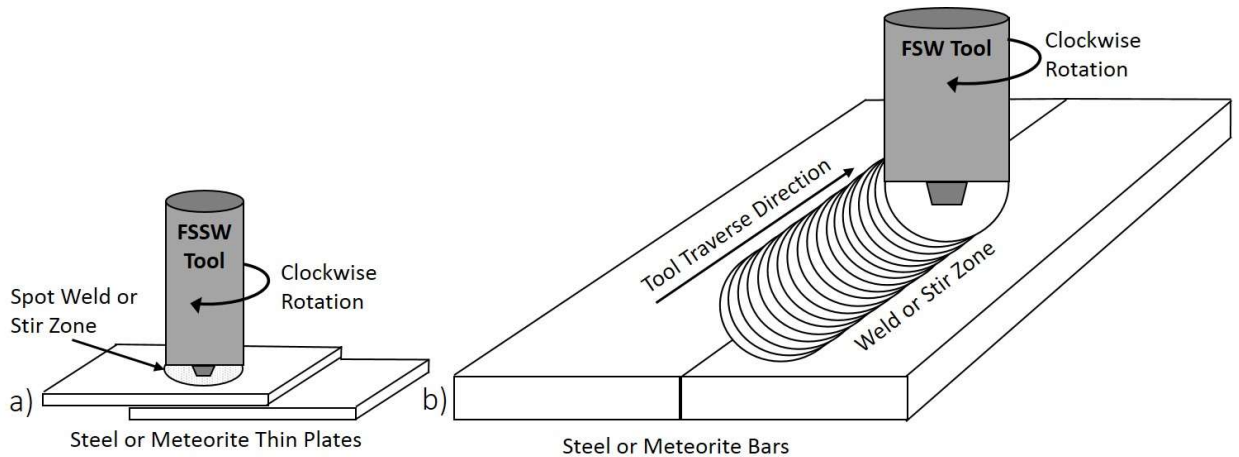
a) Friction Stir Spot Welding process(FSSW) which creates a single point spot weld. b) Friction Stir Welding (FSW) which creates a linear weld line.
